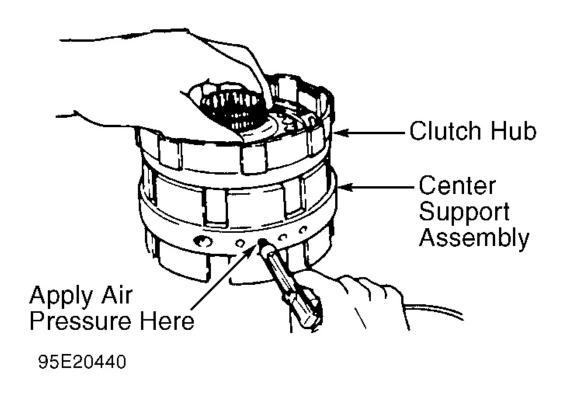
Removing Clutch Piston From Clutch Hub On Direct Clutch Assembly Courtesy of ISUZU MOTOR CO.
